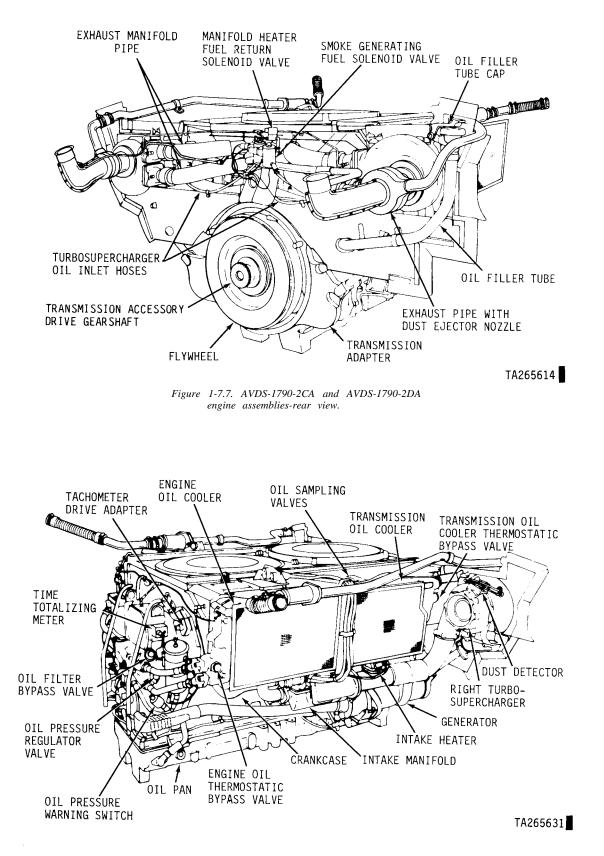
AVDS-1790-2DA engine assemblyright front view.
